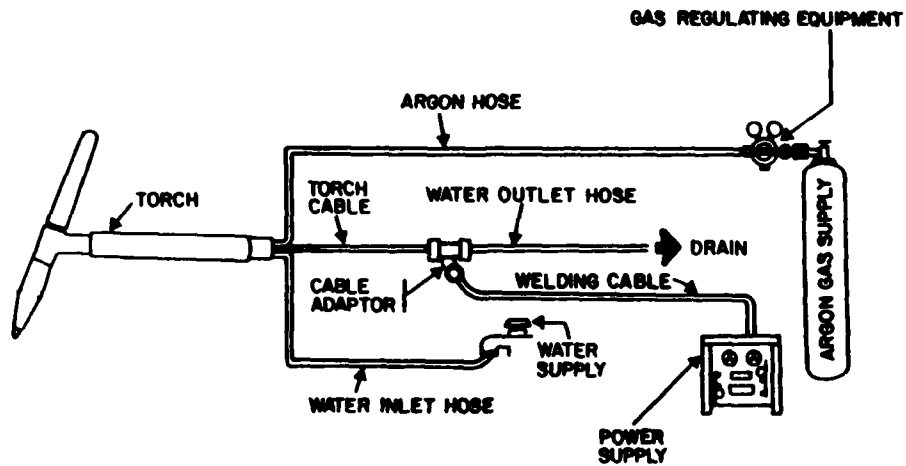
Schematic diagram of the gas tungsten-arc welding process.
